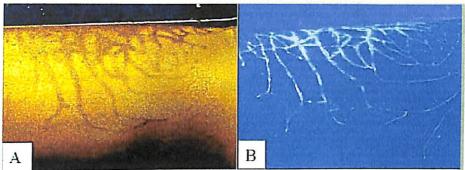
Thermal cracking indications in MCrAlY coating at the leading edge of a blade, as shown by a) colour dye penetrant testing; b) fluorescent penetrant testing.
